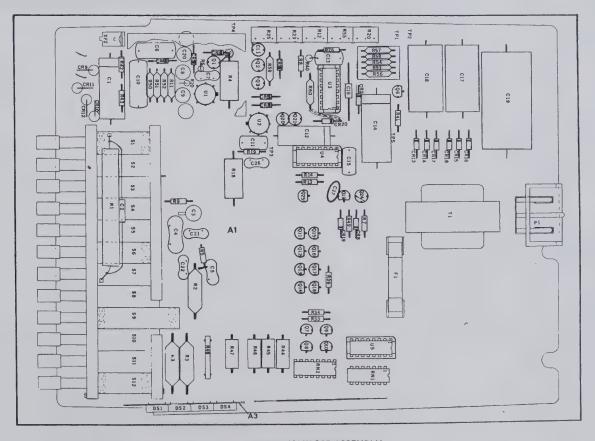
8000A MAIN PCB ASSEMBLY
